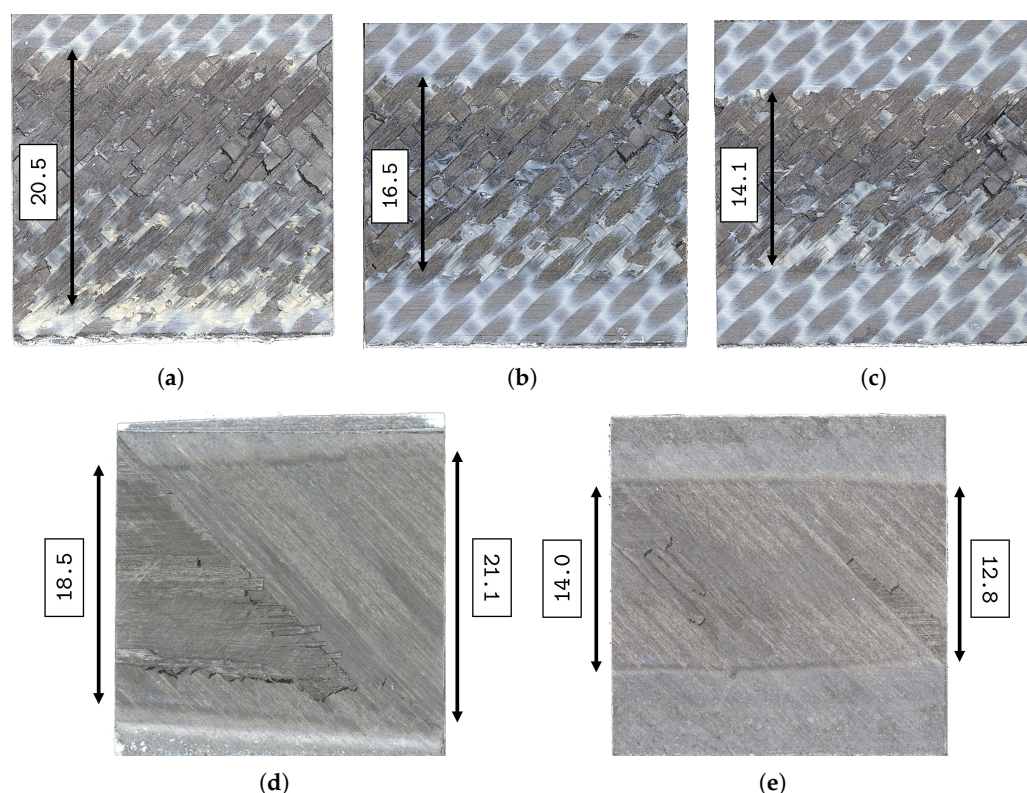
Fracture surfaces of specimens (a) A2, (b) B3, (c) C4, (d) D1, and (e) E2.
